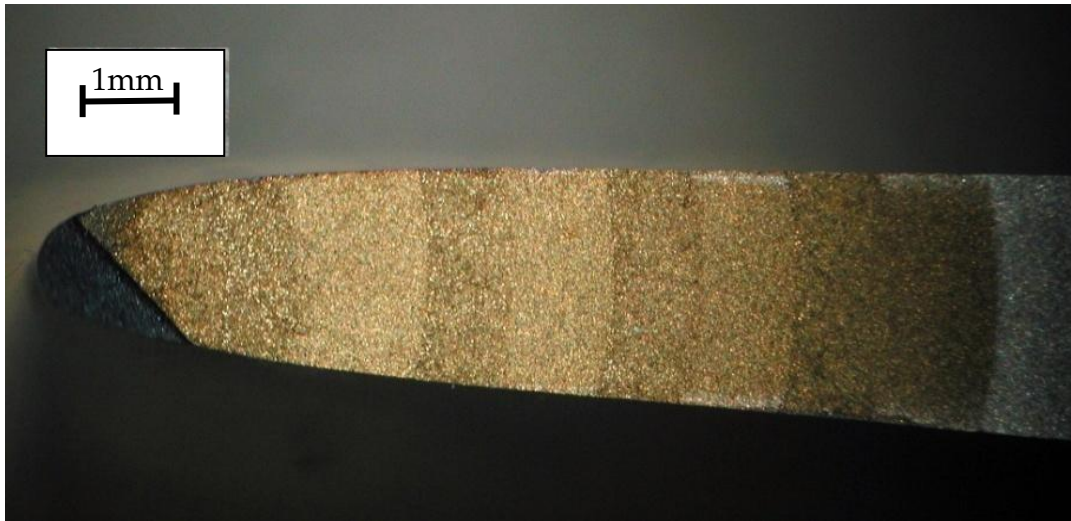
Crack fronts in cross sectional view of the leading edge, produced by alternating fatigue loads and heat tinting treatment post testing.
